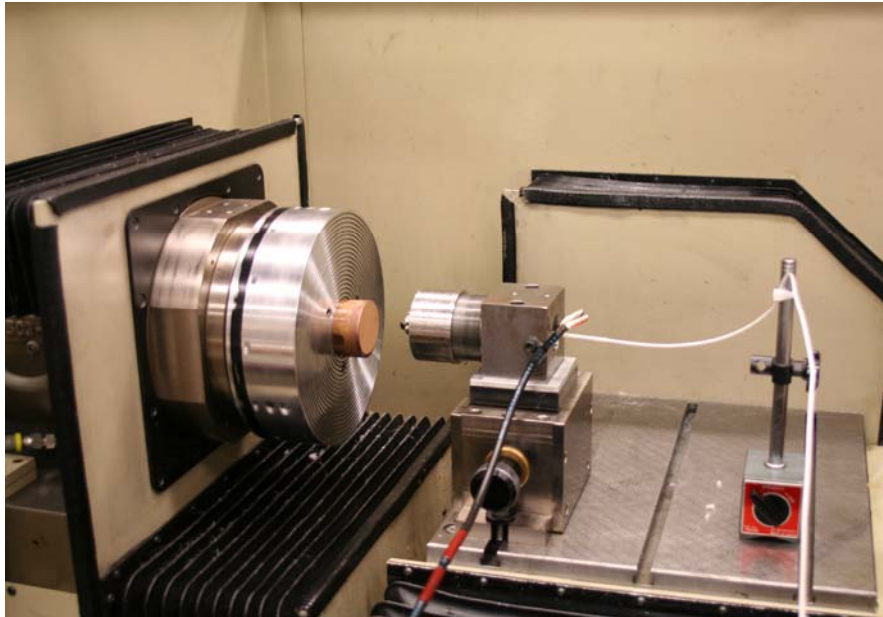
Diamond Turning Machine with FTS for instant depth of cut change nicked tool edge that may have been damaged by contamination in the ASG-2500 lubrication system.
